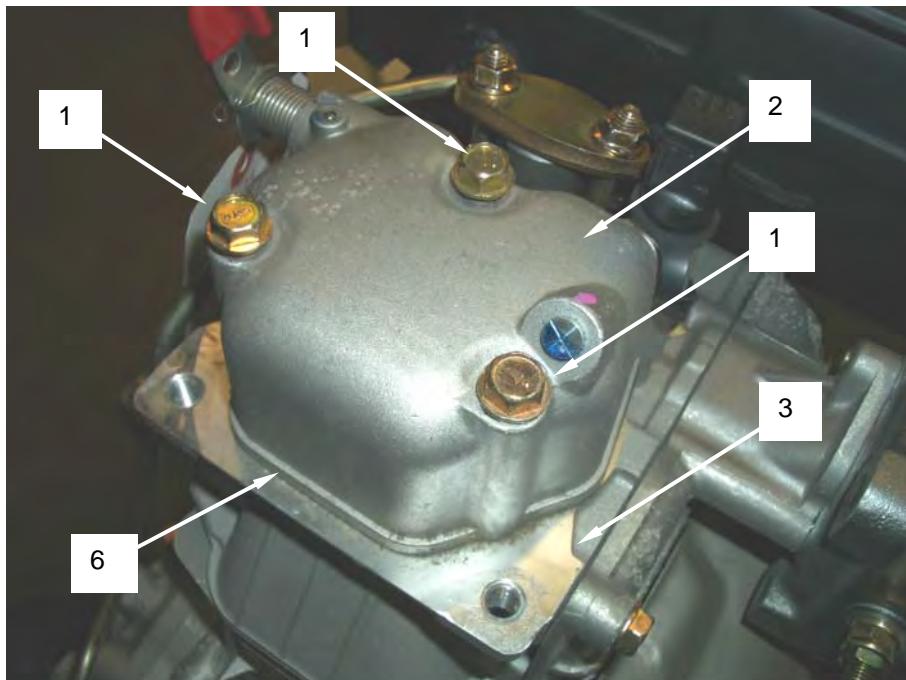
Remove, Adjust, and Install Rocker Arm Assembly (Sheet 1 of 2).
